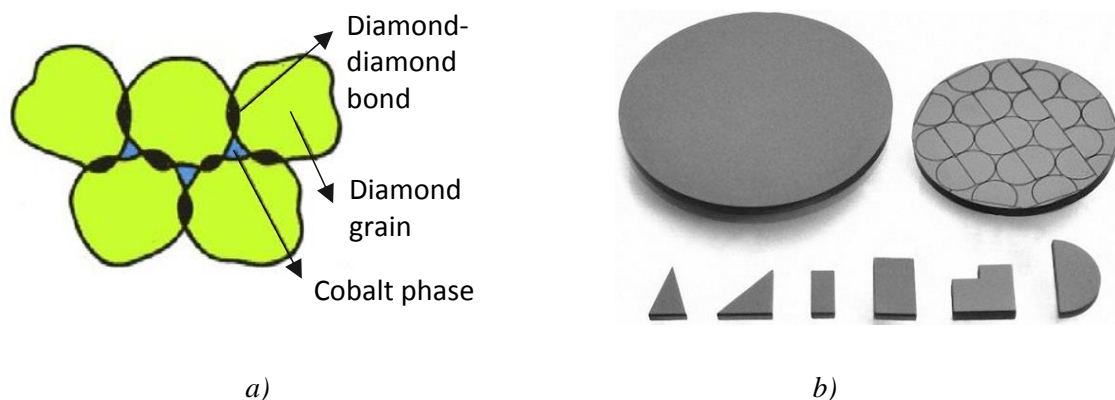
a) Sintered structure of PCD, b) PCD bulk products and PCD tips cut out of the PCD blank [9], [1].
